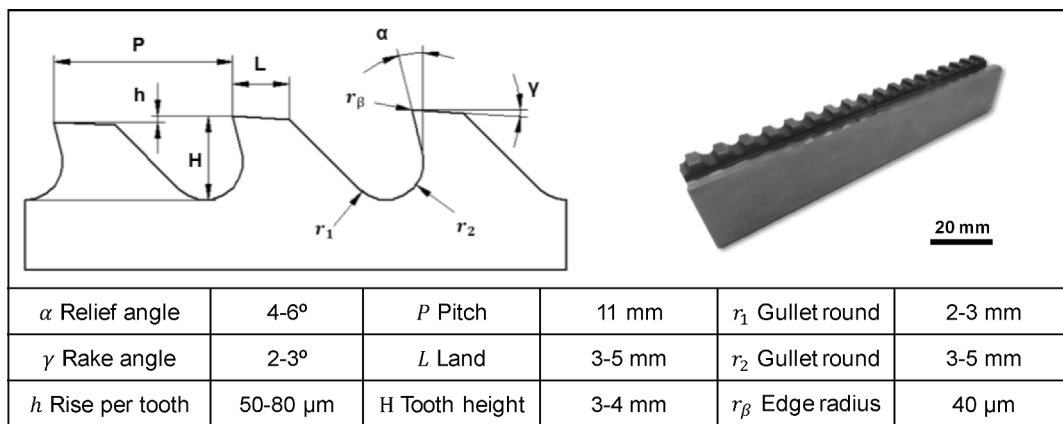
Geometry and general characteristics of the coated broaching tool (Tool A and B).
